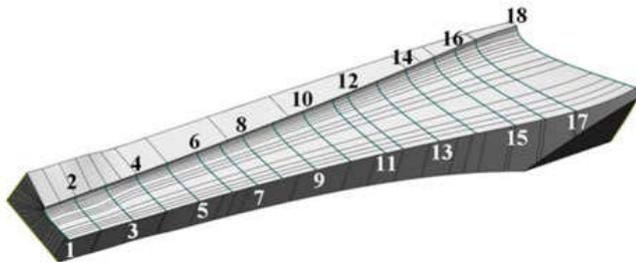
Nominal geometry of Mold Turbine Blade [8]
